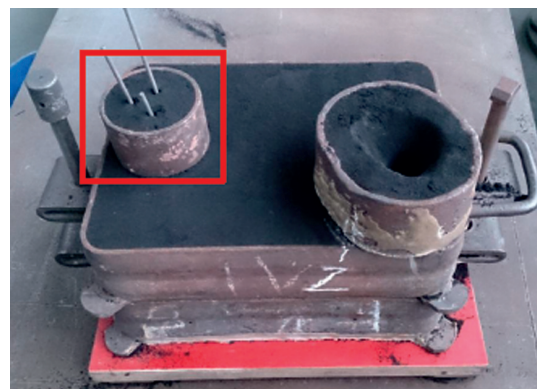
Casting mould showing marked place where samples were taken for the determination of gas content
